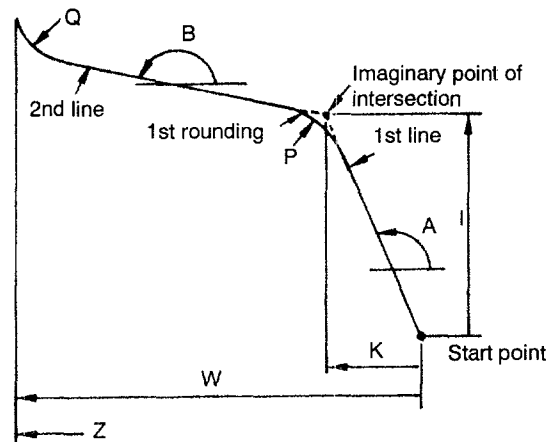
Rounding on Both Ends of Taper and Programming Format (Z-axis Commands)
